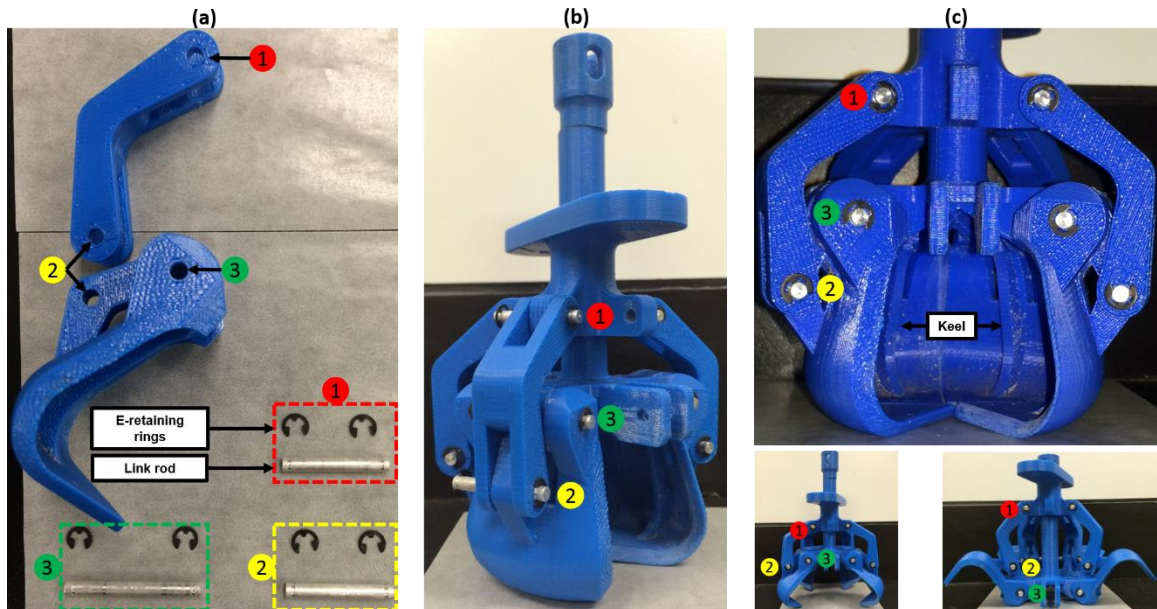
Assembled 3D printed bioinspired Aristotle's lantern parts. (a) E-retaining rings and link rods are used to fasten the 3D printed tooth parts at three joint positions. (b) Assembled bioinspired Aristotle's lantern with one tooth removed. (c) View of the keel for individual teeth and the changing joint positions when the lantern is partially (left) and fully open (right).
